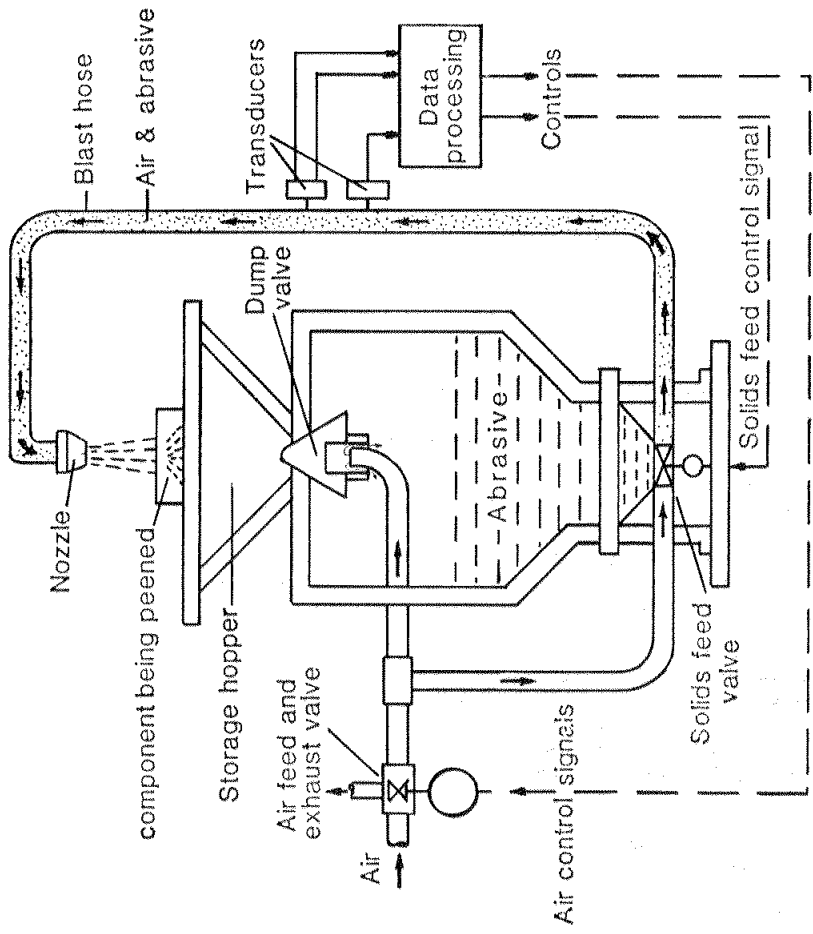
COMPRESSED AIR TYPE PEENING MACHINE
